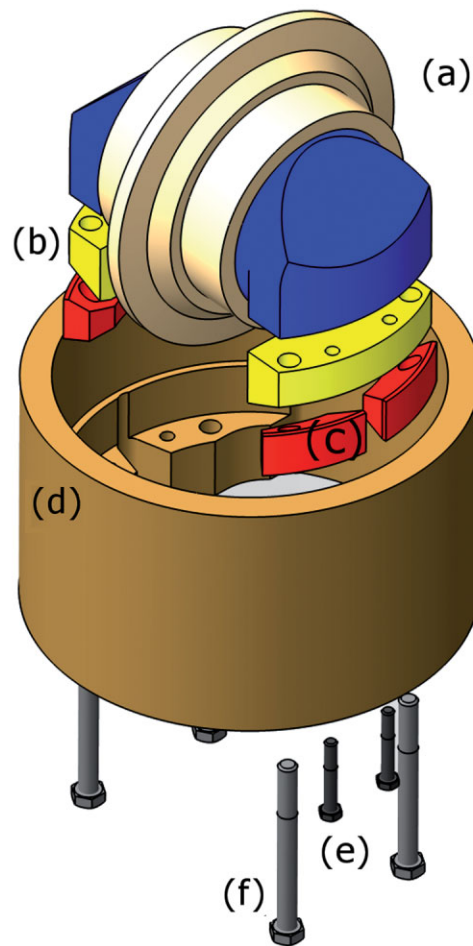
Exploded drawing of a disc with housing [10]; (a) disc with cutter ring, (b) tapered support surfaces, (c) mounting shells, (d) housing, (e) M16 bolts to fix the mounting shells, (f) M24 bolts for disc changing
